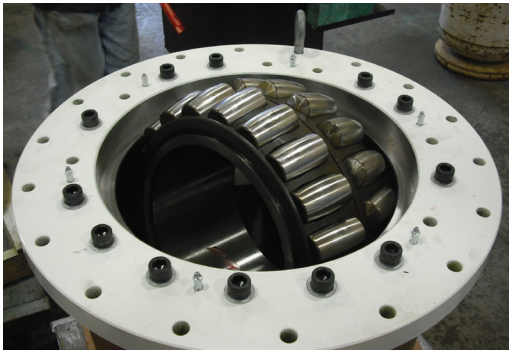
One of the elevation axis spherical roller bearings is assembled into its outer race.
